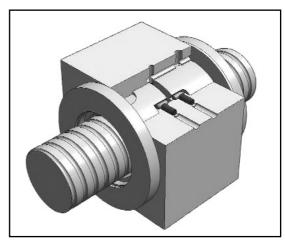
Double flanged nut with preload adjustment, outward facing flanges
